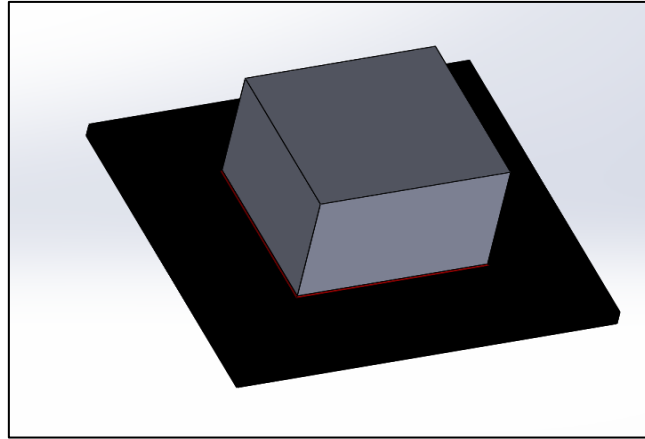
Case 2 - Model of Square Welding on Base.
